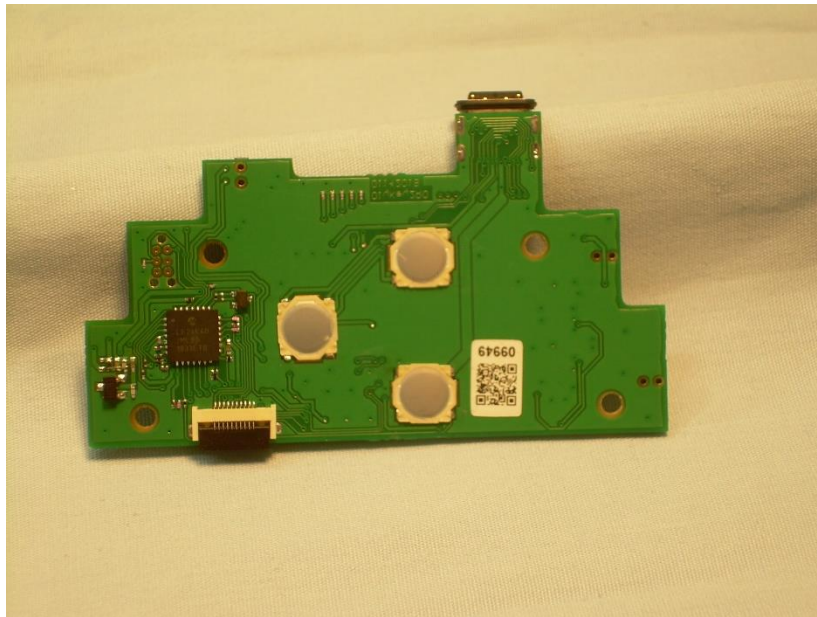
Front Side of the Main PCB with RF Shield Removed
